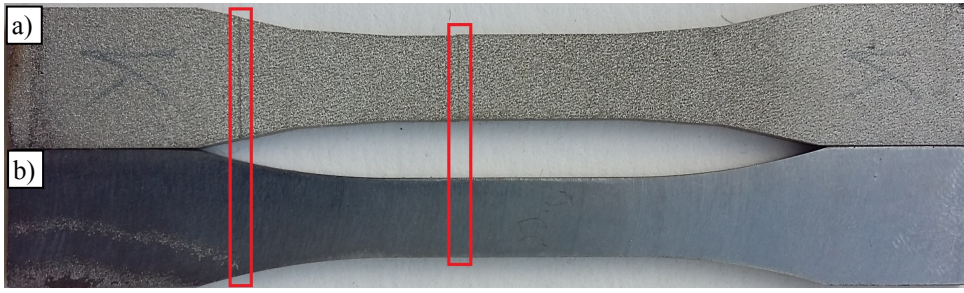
Fatigue specimens with marked re-melting areas: a) as-built and b) machined
